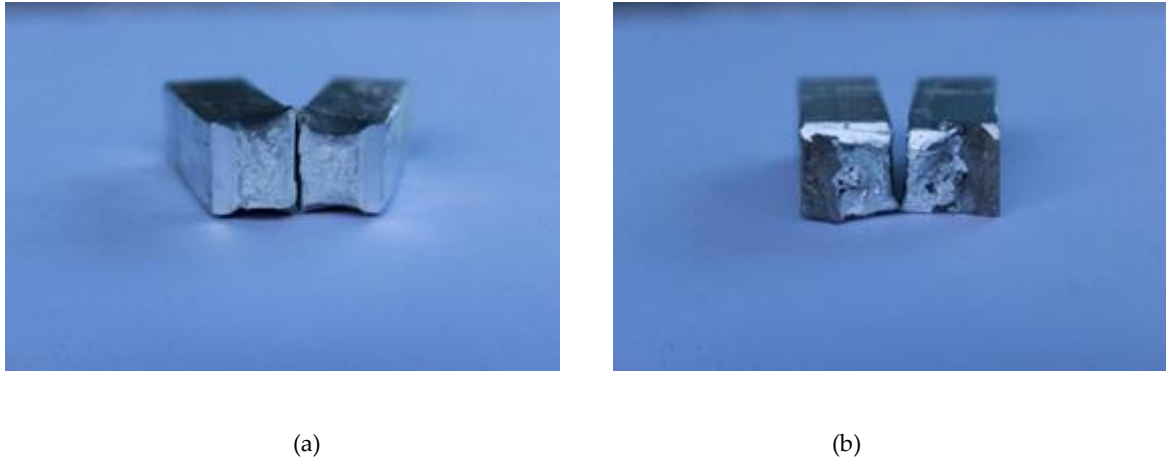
Fracture of aluminum test specimens (a) 5052 base metal (b) 5052 welded
